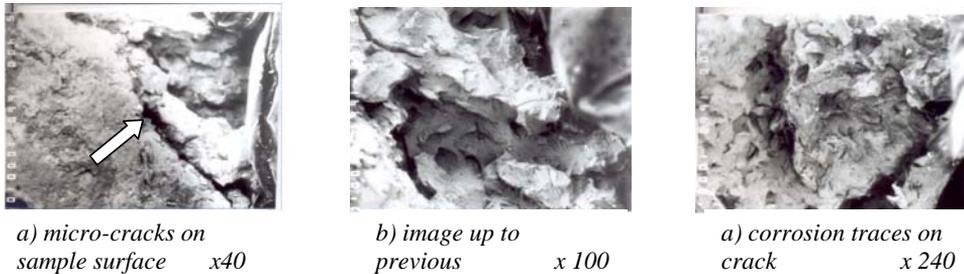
Micro-fractography of crack surface in in the sample located immediately to welded joint
